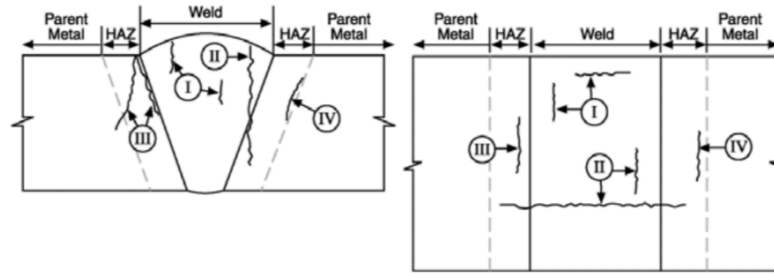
Typical Fracture Modes in Cr-Mo and CSEF Steel Weldments [15]
